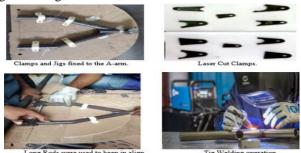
Setup of jigs, Fixtures for manufacturing feasibility.
